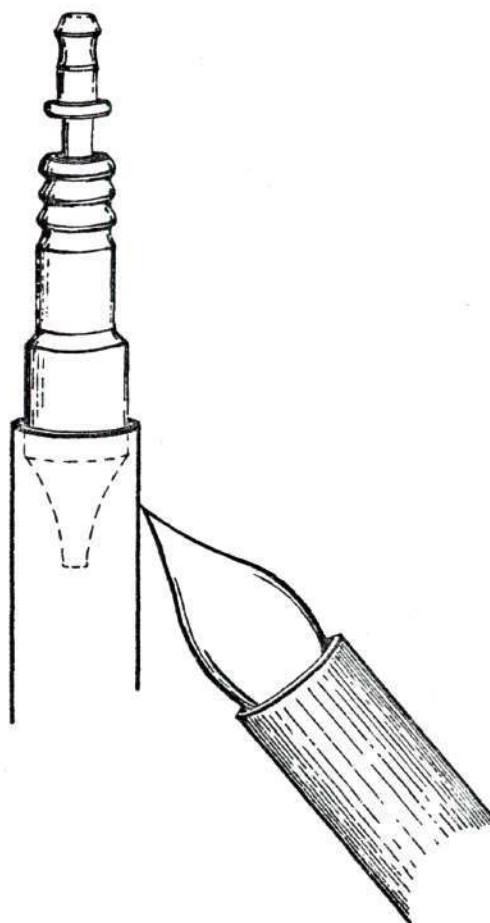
A Schematic Drawing of Sealing a Loaded Resistor Spark Plug.
